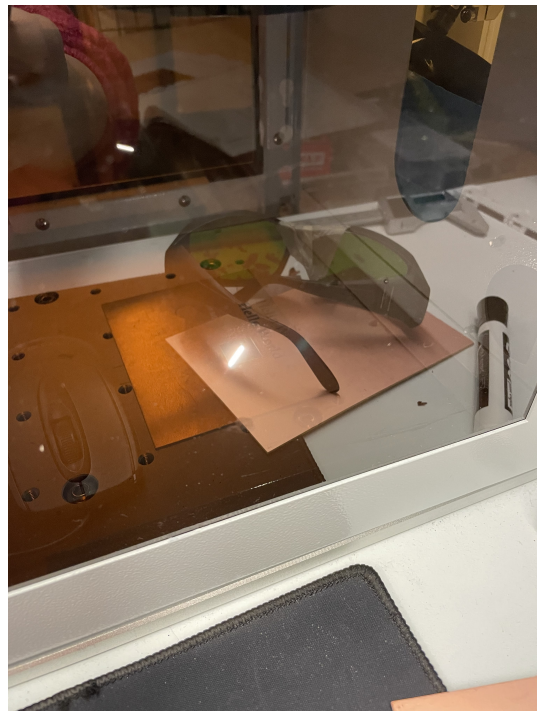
The Triumph laser cutting (and merely etching) into the PCB.
